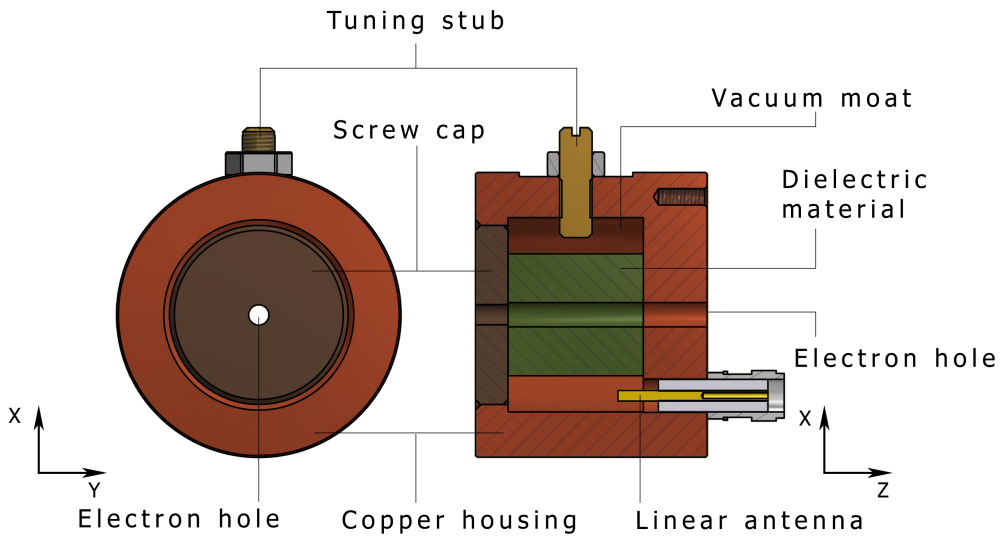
Design drawing of the optimized  $TM_{110}$  cavity. The  $z$ -axis runs through the electron hole. The dimensions are specified in Fig. A.2.
